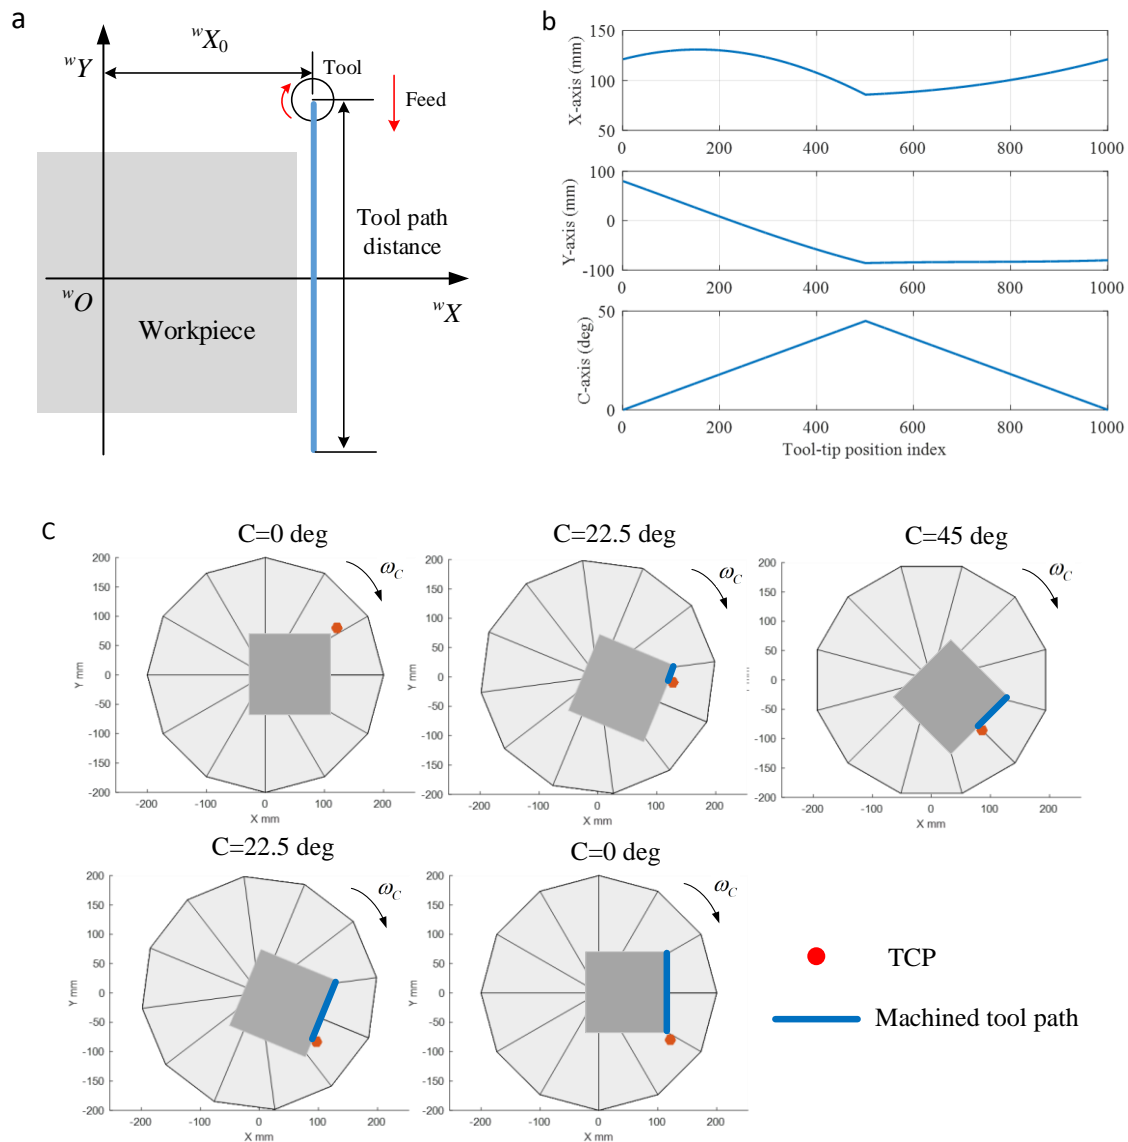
Tool path in WCS and MCS in the proposed machining test (a) Tool path in WCS, (b) Reference trajectories in MCS, (c) Tool path in MCS.
